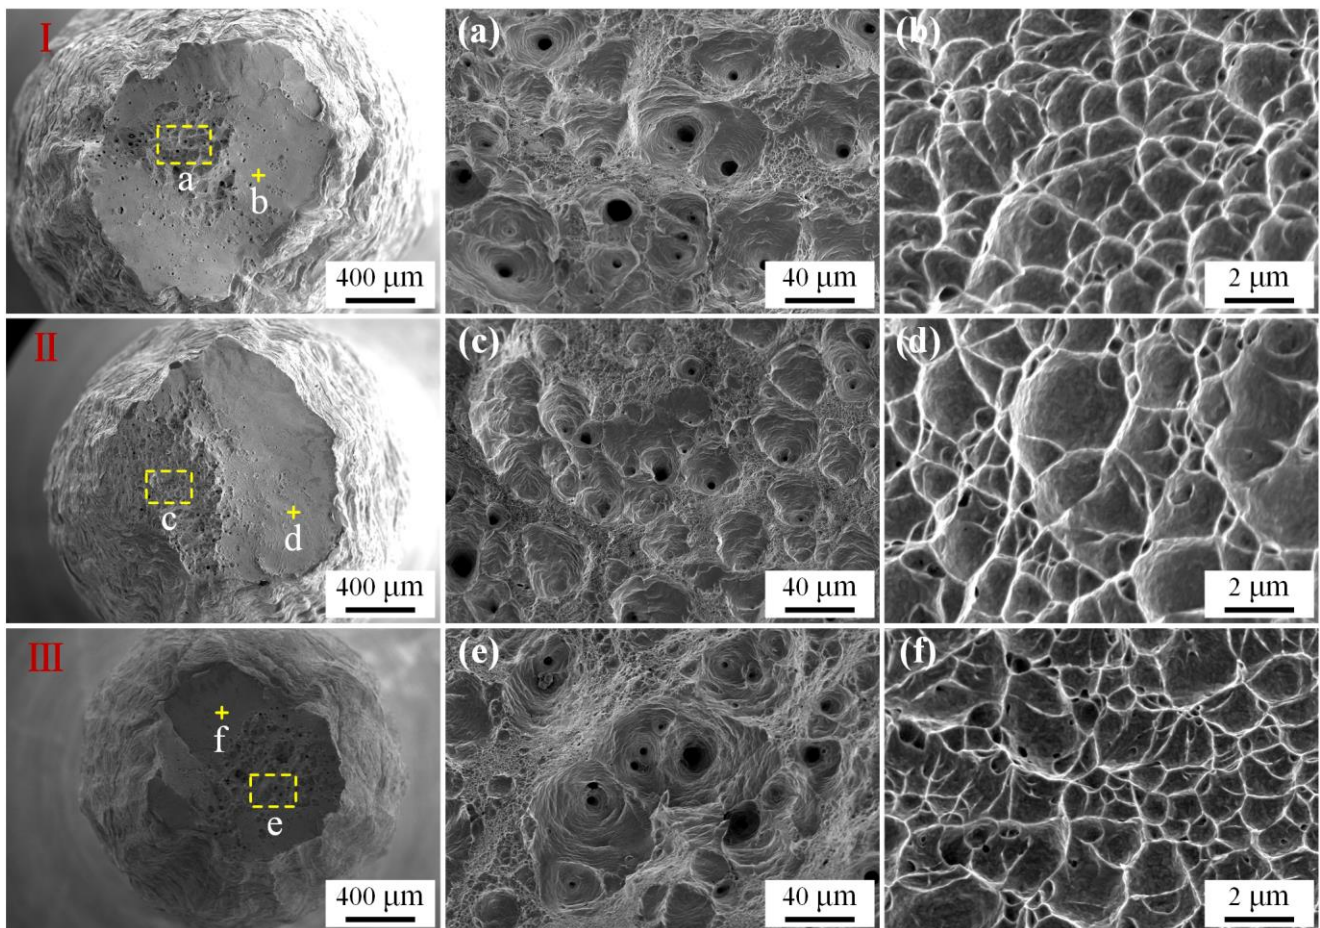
Fracture morphologies of tensile specimens derived from the 1# bonding joint.
